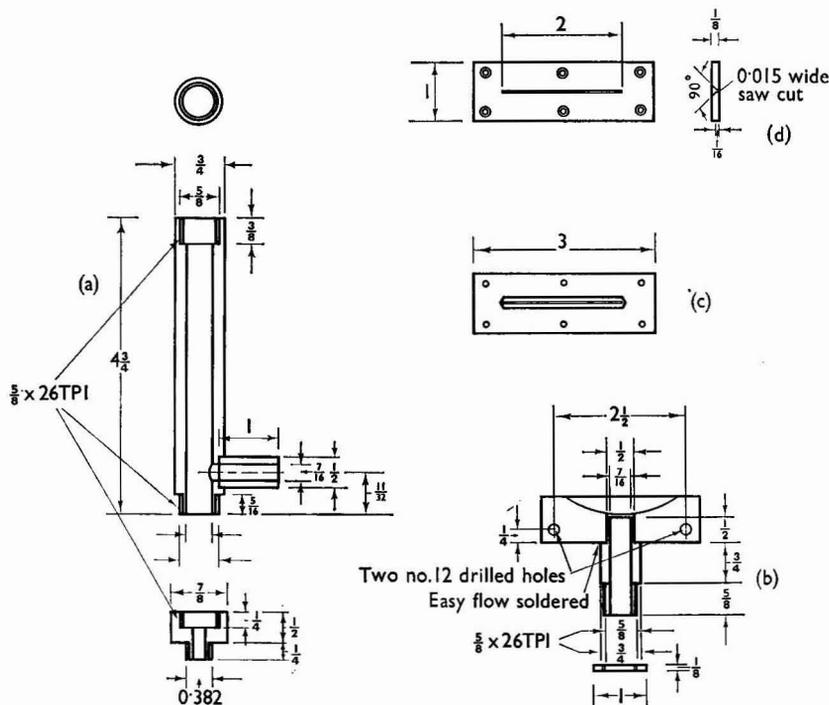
Diagram showing burner parts with dimensions; all measurements are in inches. (a) Burner pre-mixing chamber, side view; (b) burner head, side view; (c) under surface of burner-head plate; (d) upper surface of burner-head plate
